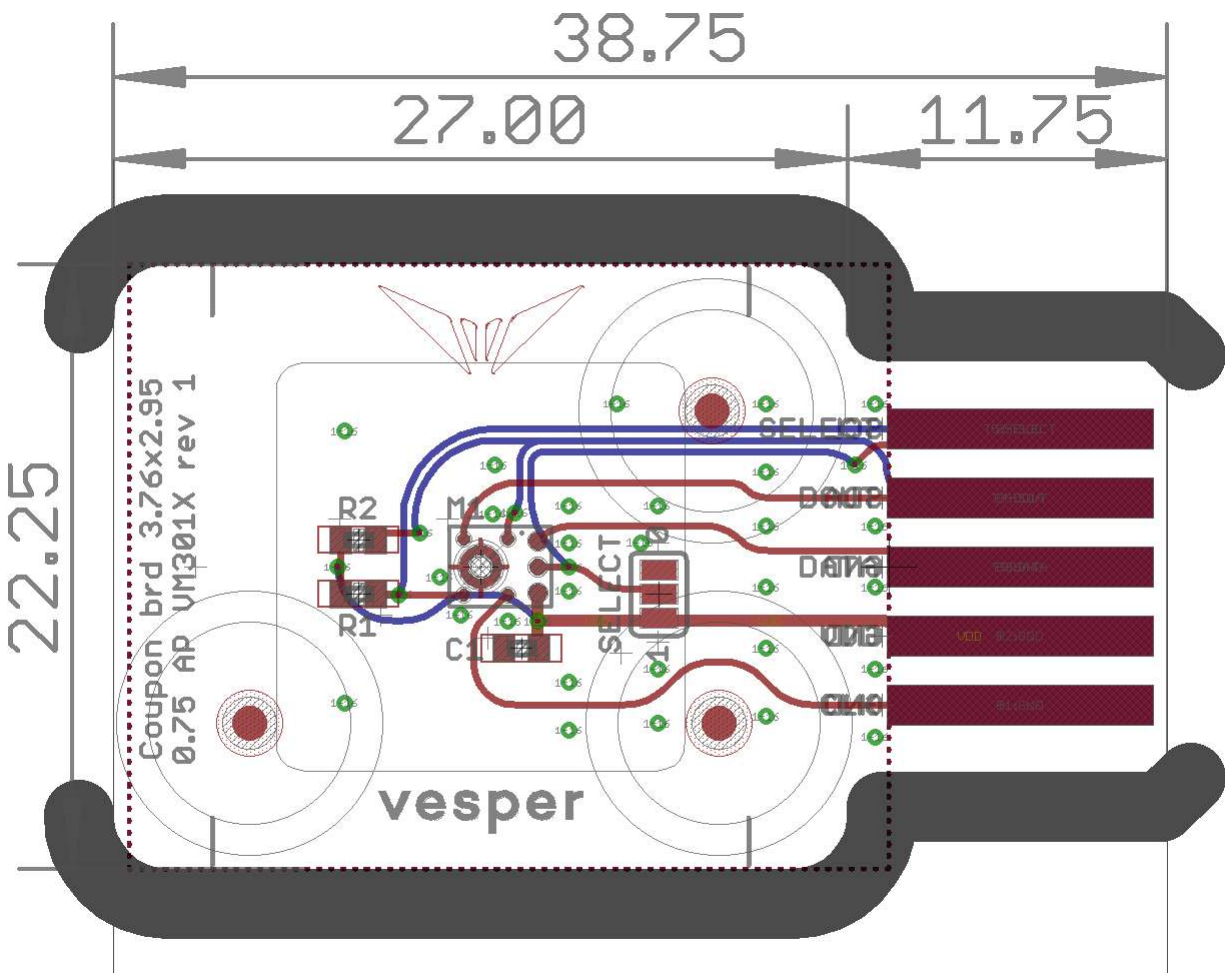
S-VM3011-C Coupon PCB Board Layout (all dimensions in mm)
